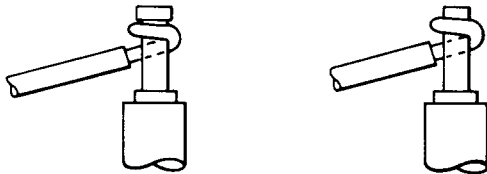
Stand-off and Grooved-Type Terminals (Solder Not Shown)
